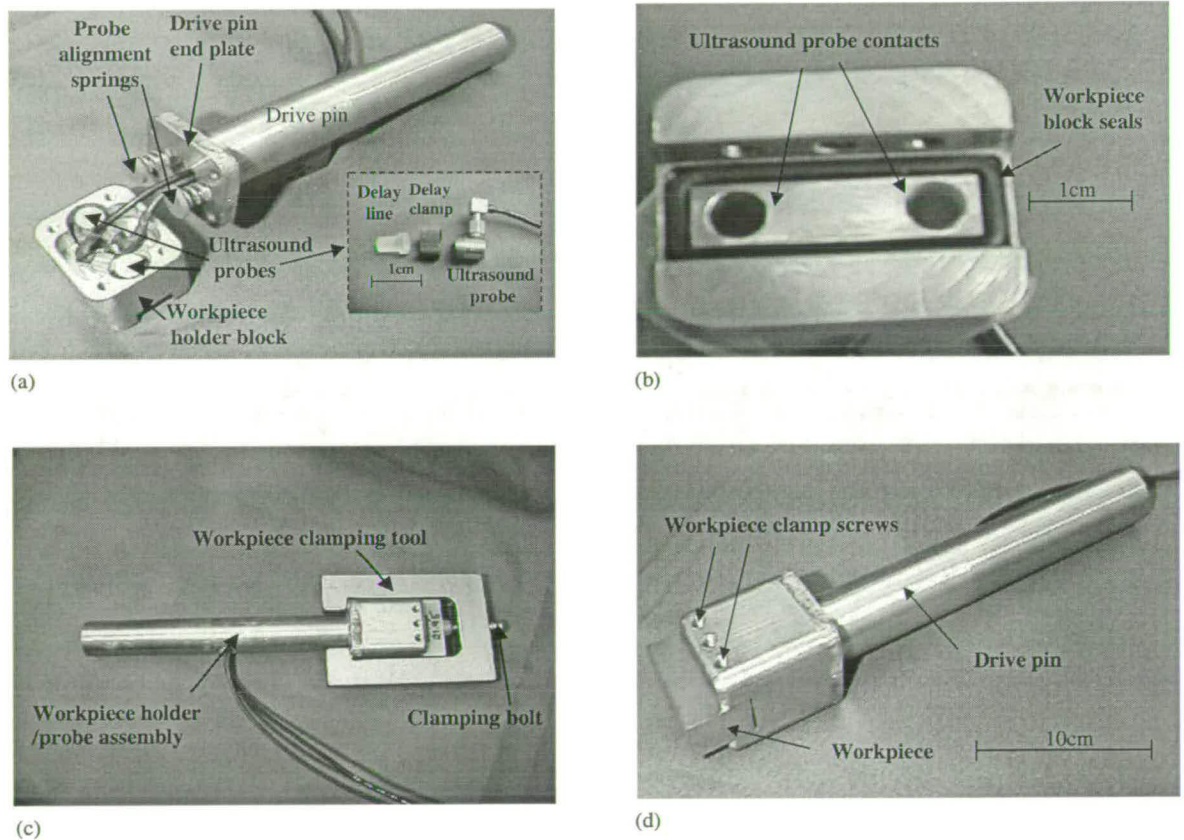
Views cell2000 workpiece/drive pin assembly illustrating; (a) internal view of workpiece block showing encapsulated probes, (b) probe contact points and block seals, (c) procedure for workpiece clamping, (d) completed assembly
